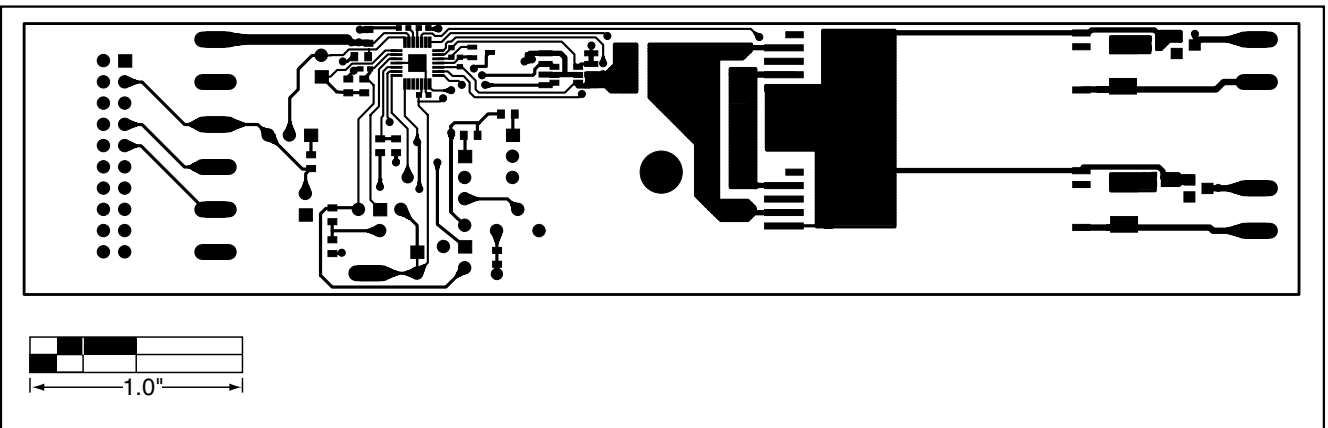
MAX1895 EV Kit PC Board Layout—Component Side
